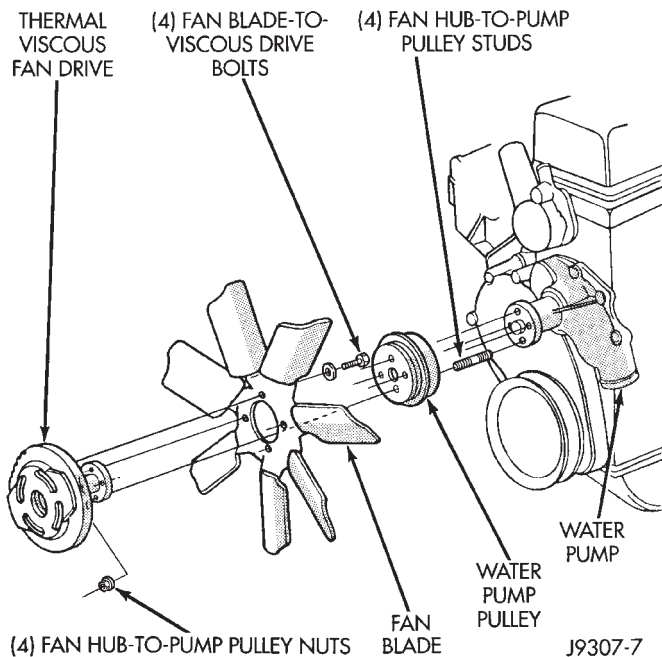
Fan Mounting Nuts—4.0L 6 Cyl. Engine
